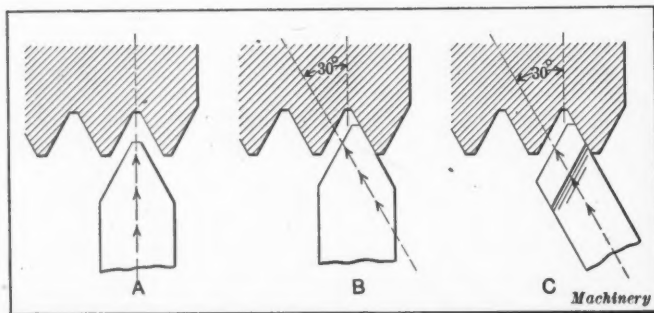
Straight and Angular Methods of feeding Tool when cutting Thread in Lathe
